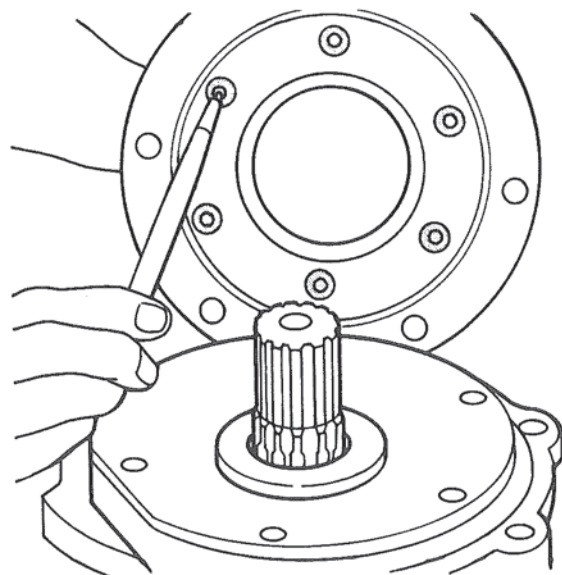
Inspecting and Assembling Pinion Cage Assembly.
